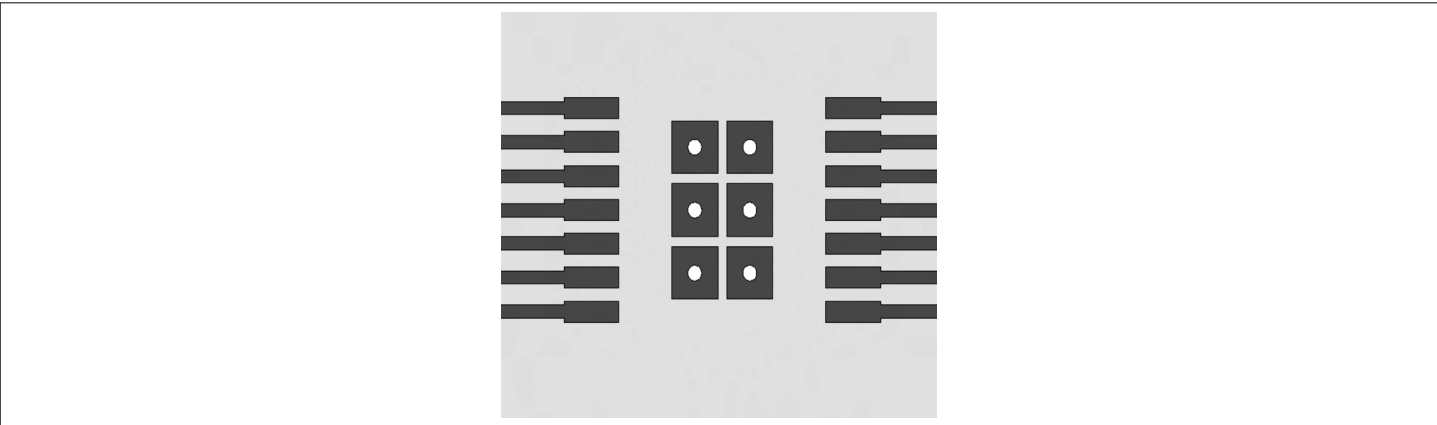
Thermal vias on PCB for 2s2p PCB setup
